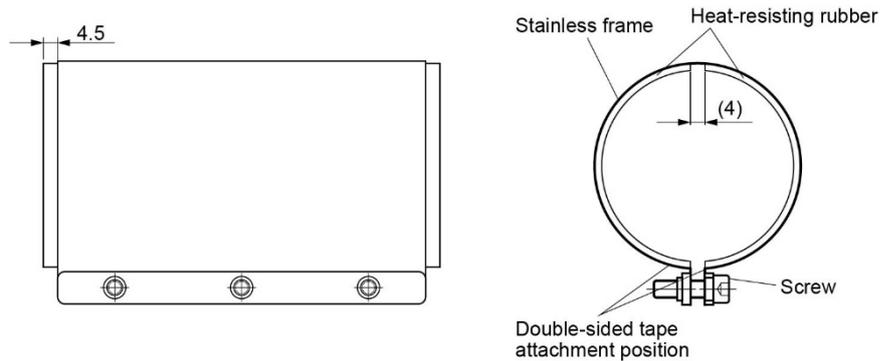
Position for mounting the heat-resisting rubber on the stainless frame (with no opening)
